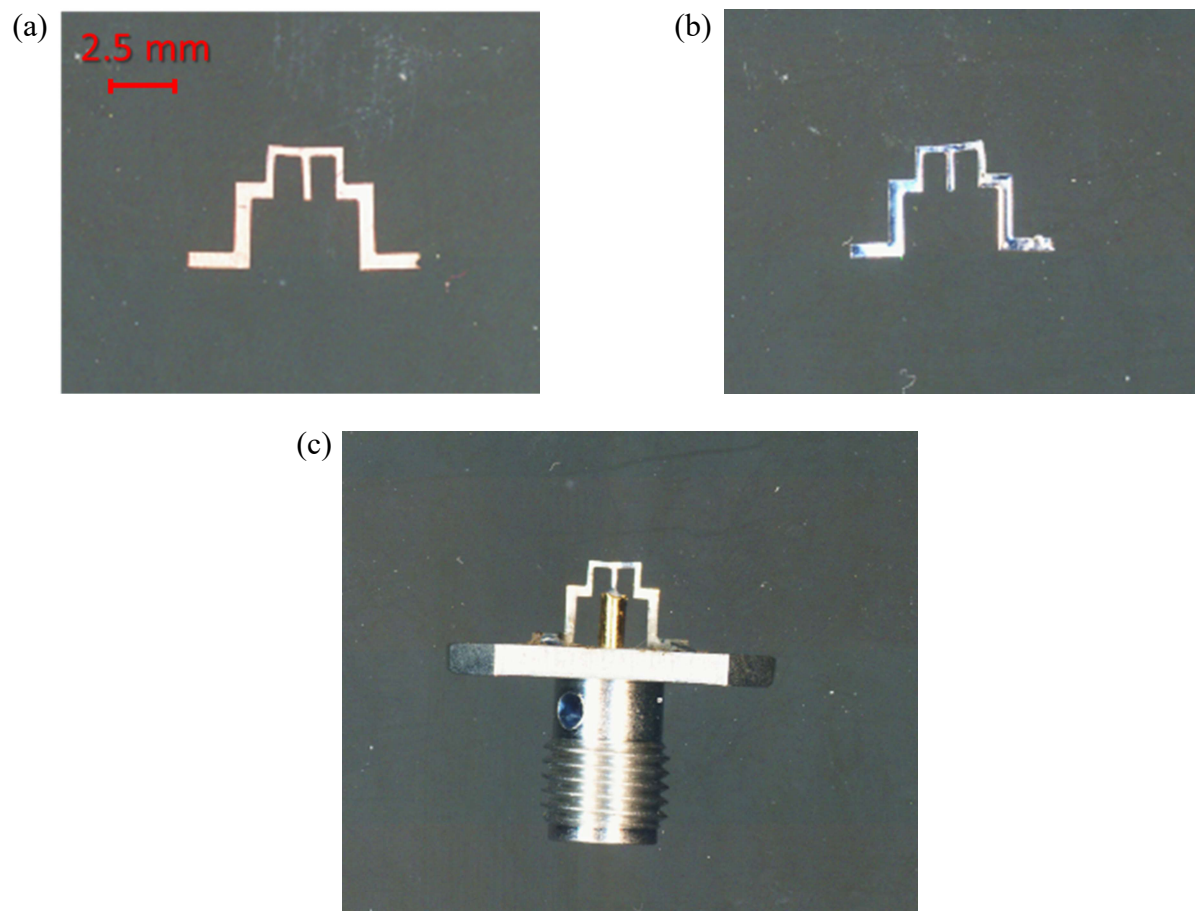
(a) Photo of a machined split coil. (b) Photo of a machined split coil after being tinned with solder. (c) Photo of the completed split flux coil.
